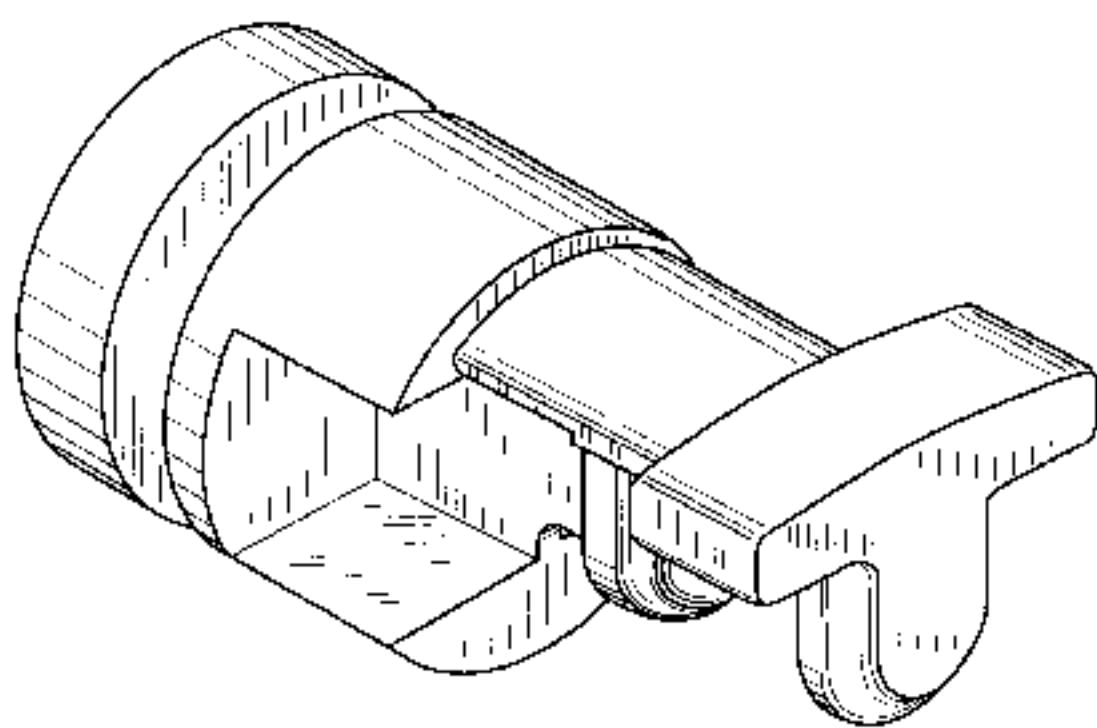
is a right side elevational view thereof, the left side elevational view being a mirror image of FIG. 23; and FIG. 24 is a perspective view thereof; and, FIG. 25 is a side view of the compressor piston of the embodiment of FIG. 1, wherein the broken lines show a
